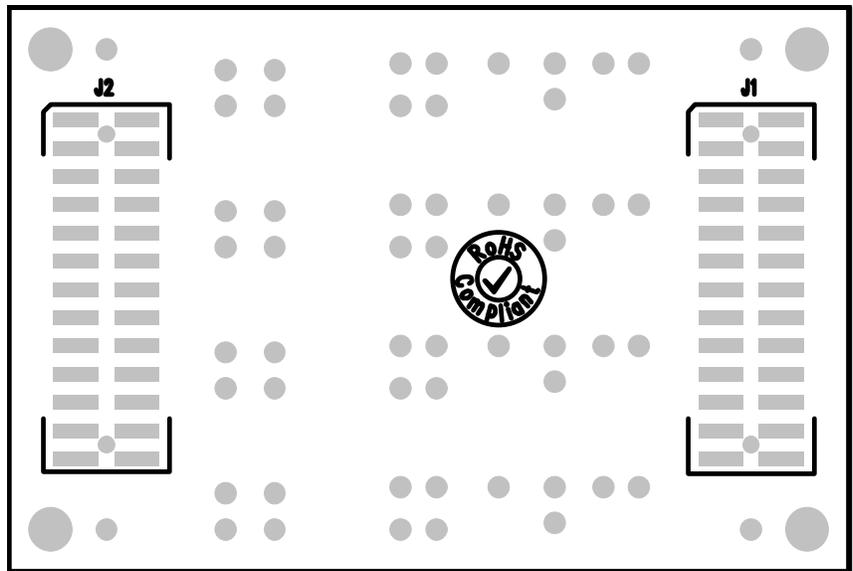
EVAL-AD7293SDZ Daughter Board Layout, Solder Side View
